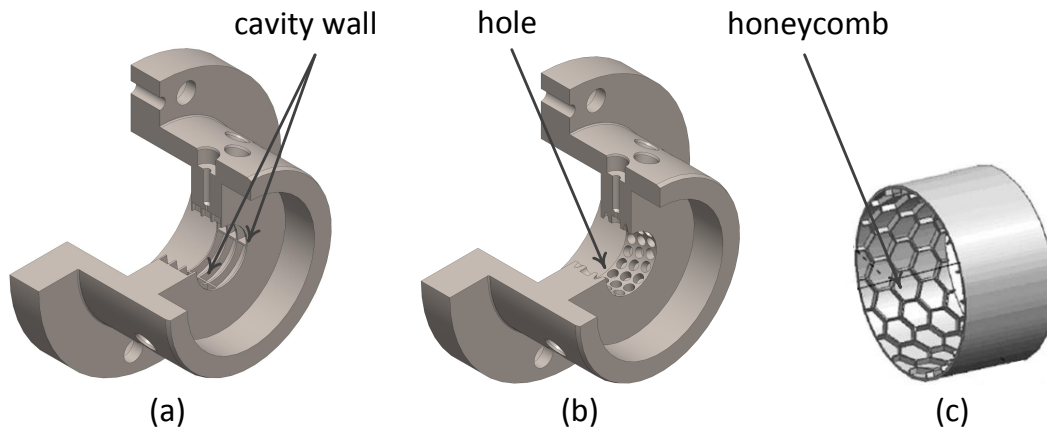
Different types of damper seal: (a) Pocket damper seal, (b) Hole-pattern seal and (c) Honeycomb seal [22]
